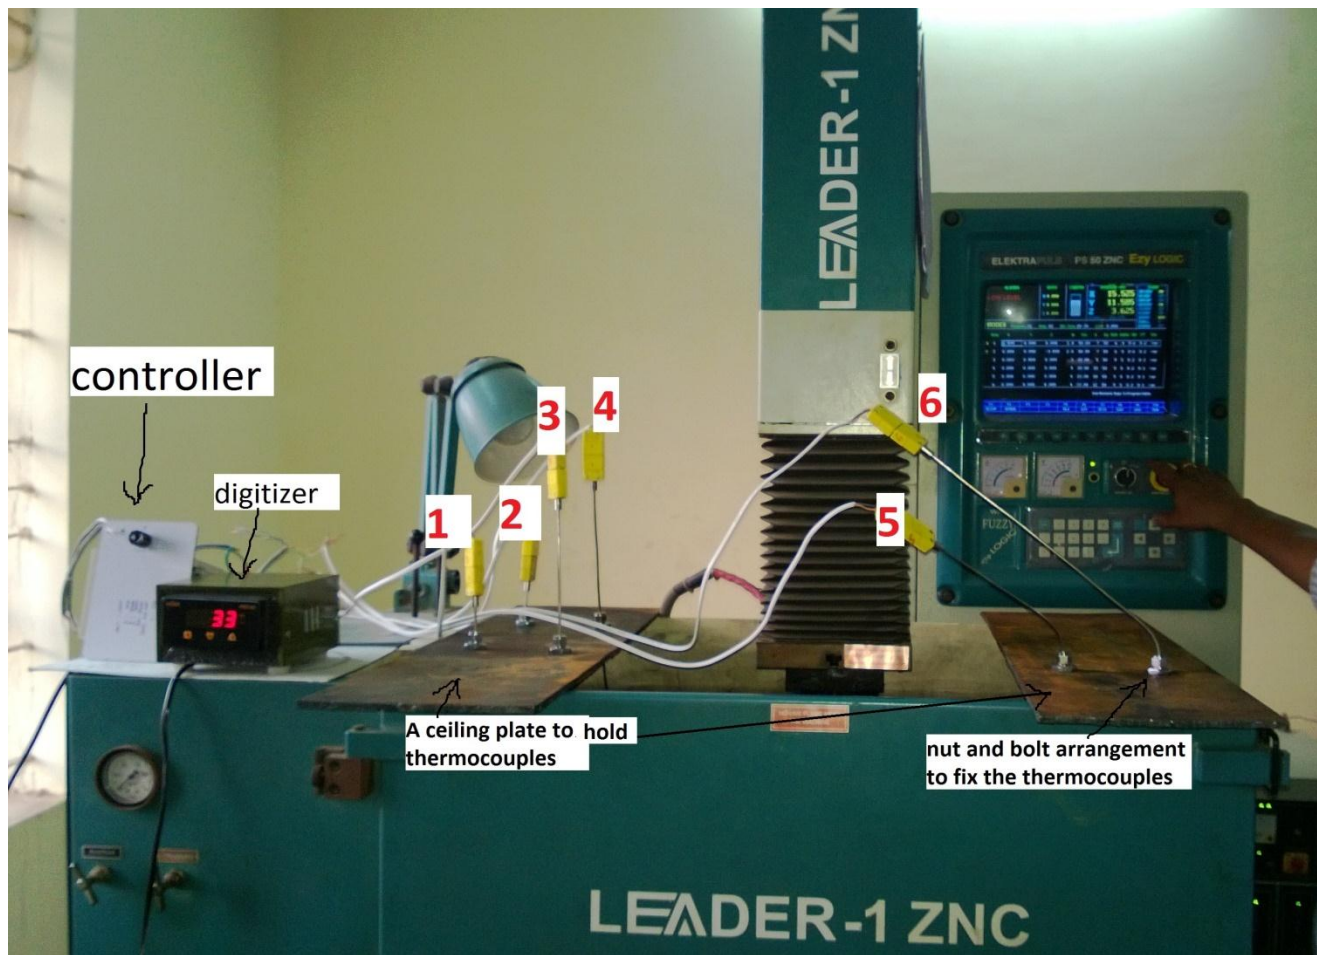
The whole set-up showing the EDM machine, thermocouples, controller, digitizer
